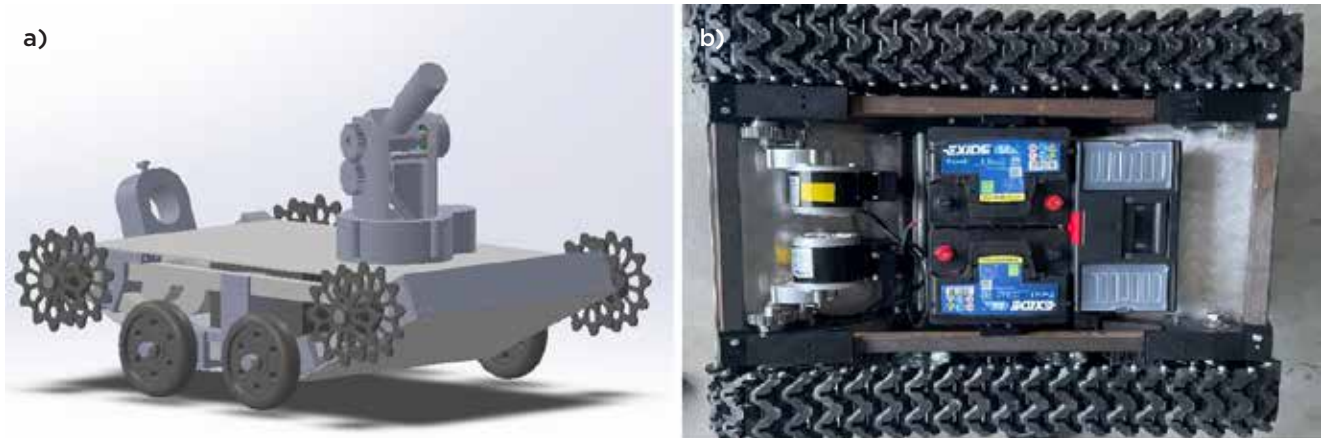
a) CAD model of Firebot, b) drive assembly with mounted components
